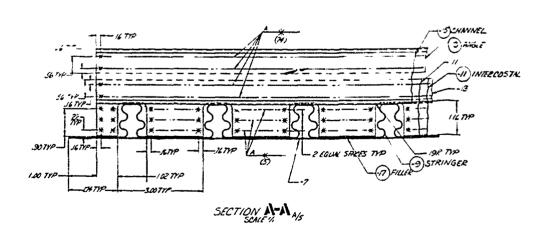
COMPRESSION SHEAR TEST PANEL - Engineering Drawing 29-01009
